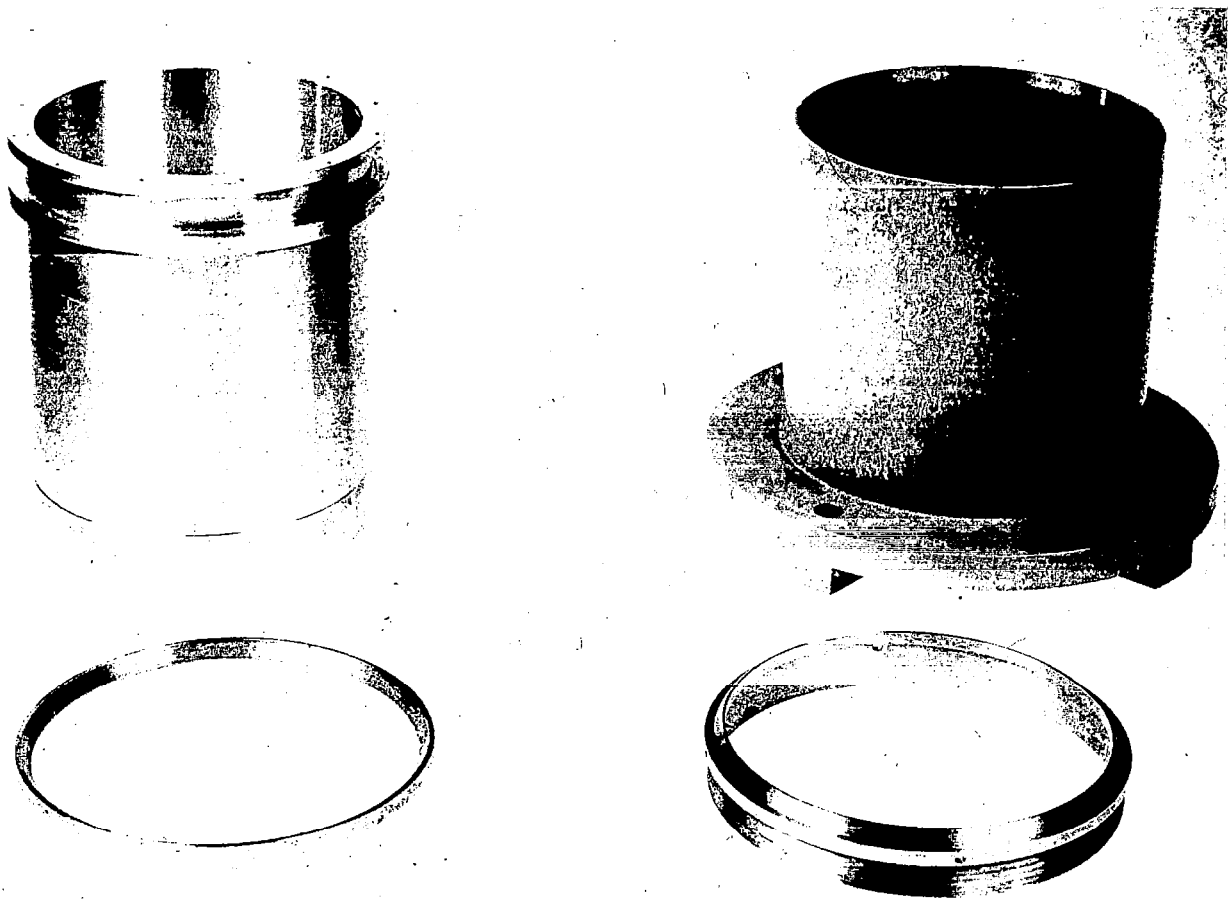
shows this housing, on the left in the photograph, prior to final finishing. The copper gasket shown in front of the housing permits additional support to minimize excursions of the cantilevered structure. At the right in the photograph is the secondary mirror-support within which the tracker must be mounted. A screw-in flange, shown before this support, is unscrewed from the support after the tracker has been bolted down, and engages the copper flange, driving it into the recess provided in the circumferential boss near the top of the tracker housing. Figure 11 shows the housing bolted in place within the mirror support, with the screw-in flange engaged. The actual secondary mirror of the telescope to be directed is not shown in the photograph; it mounts upon the bosses which appear to be the feet of the support in the photograph, and looks toward the primary reflective optics which are, in turn, looking in the same direction and along the same axis as the star tracker.
